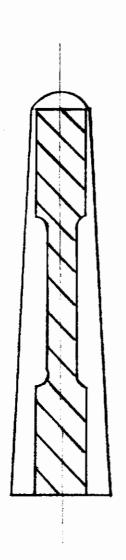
Schematic of Tensile Specimen Location in Tensile Plugs.
